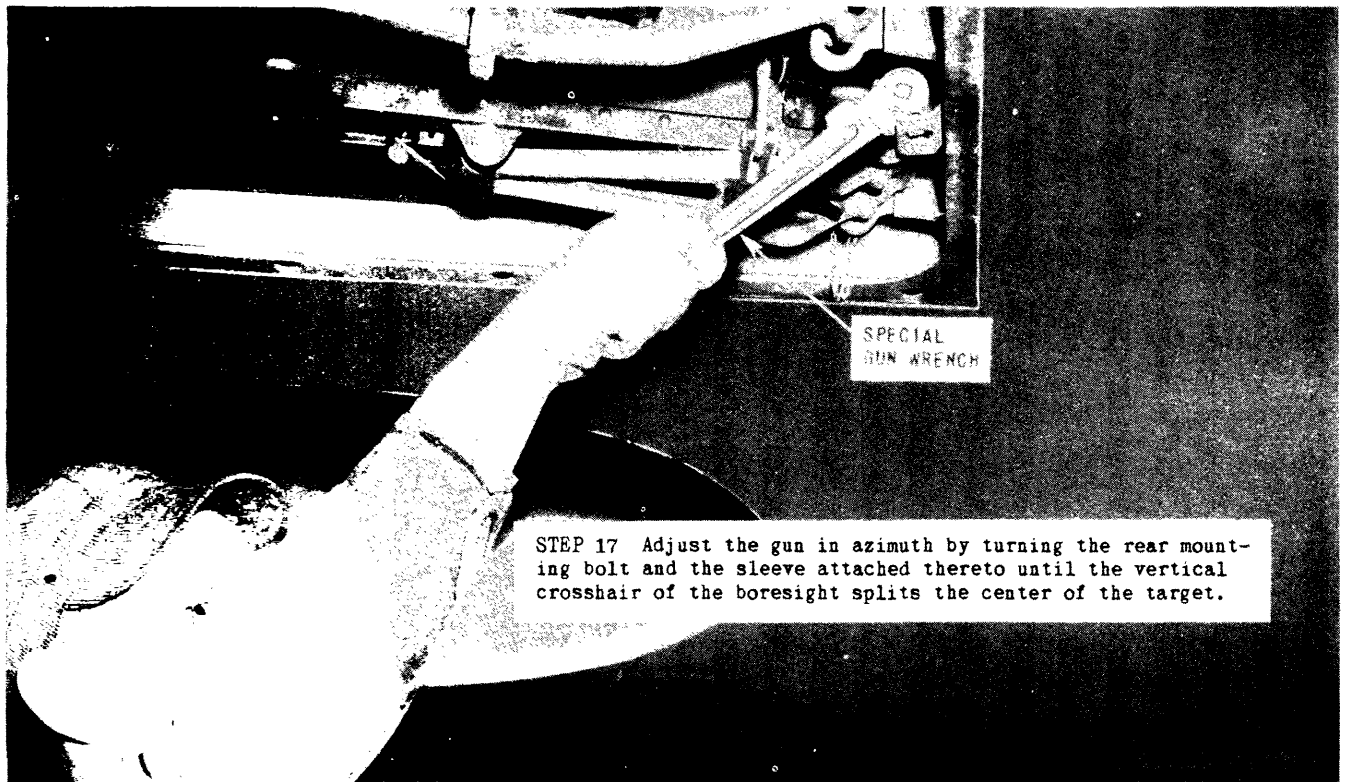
Bore-Sighting Guns - Target Method (Sheet 8 of 8 Sheets)
